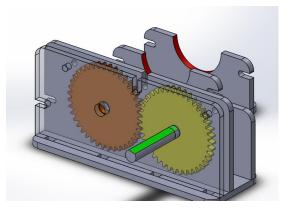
Motor and drive gears displayed in orange and yellow respectively.
